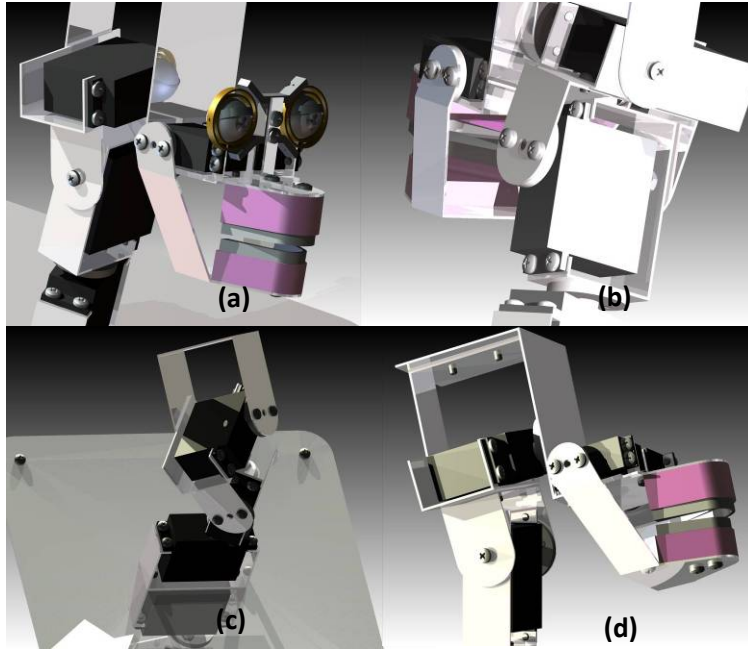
CAD renderings of (a) front view of complete robotic head, (b) rear view of complete robotic head, (c) neck assembly, (d) jaw assembly.
